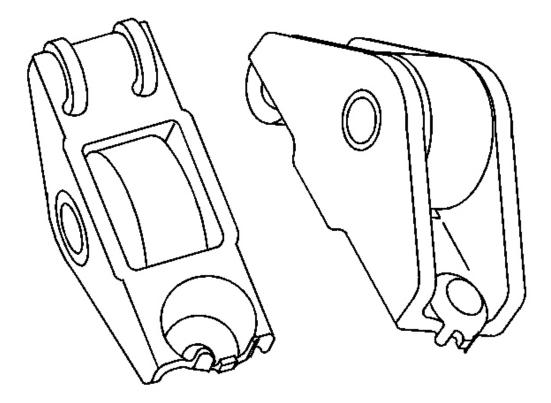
View Of Valve Rocker Arm Courtesy of GENERAL MOTORS CORP.
